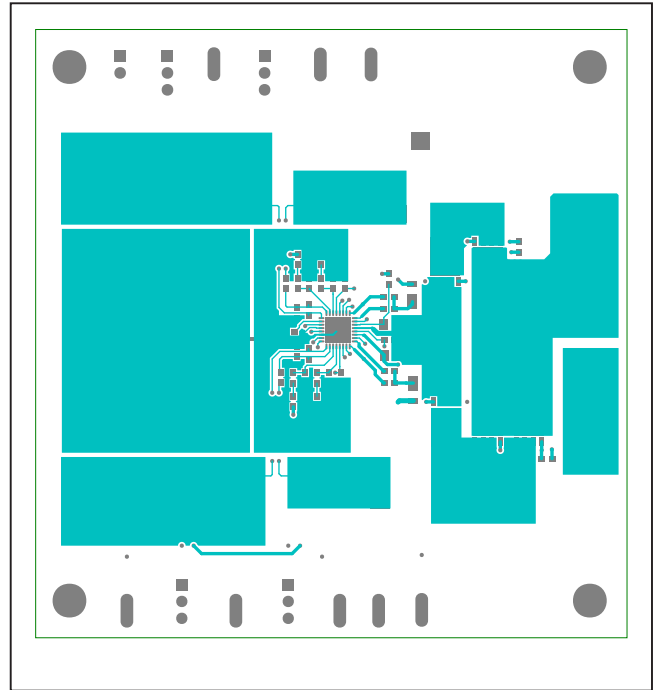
MAX17548 EV Kit PCB Layout—Component Top Side
